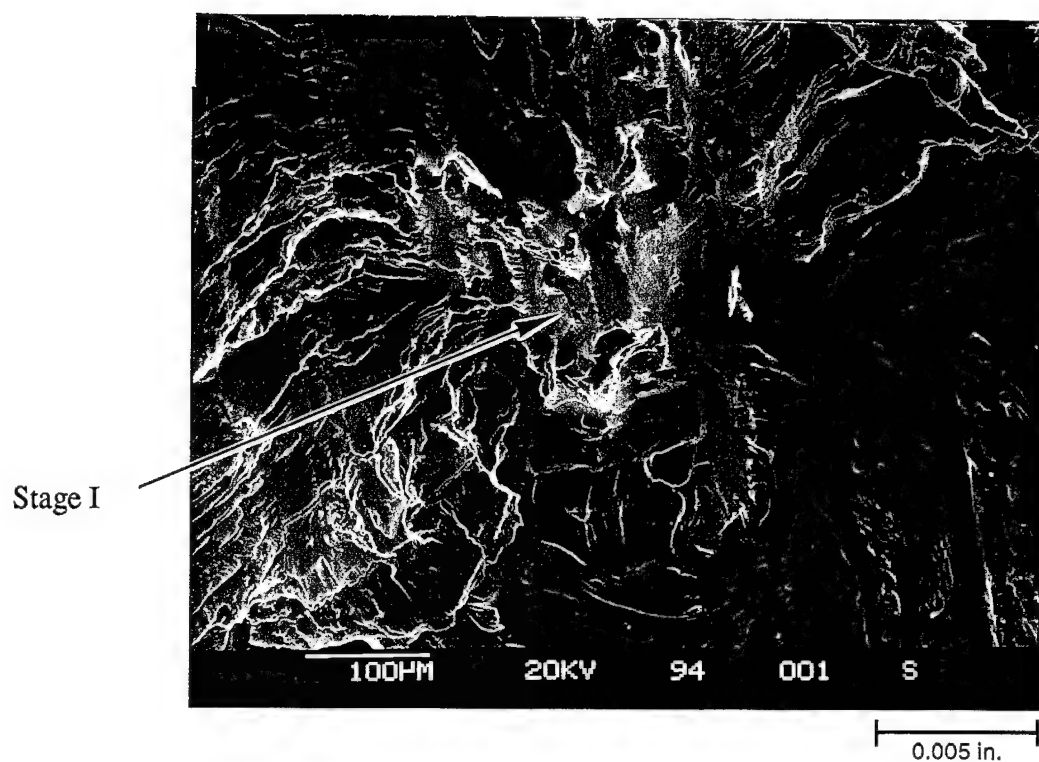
Typical smooth fatigue crack initiation site showing stage I cracking in the *thin* material.
